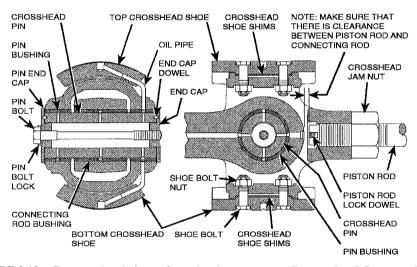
Component parts of a typical connecting rod. (*Dresser-Rand Company, Painted Post, N.Y.*)
